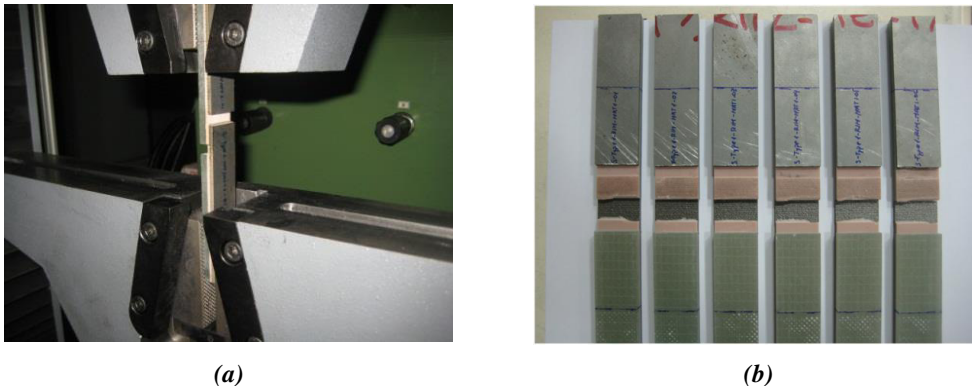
(a) Tensile testing equipment; (b) Failure of specimens using the structural adhesive
